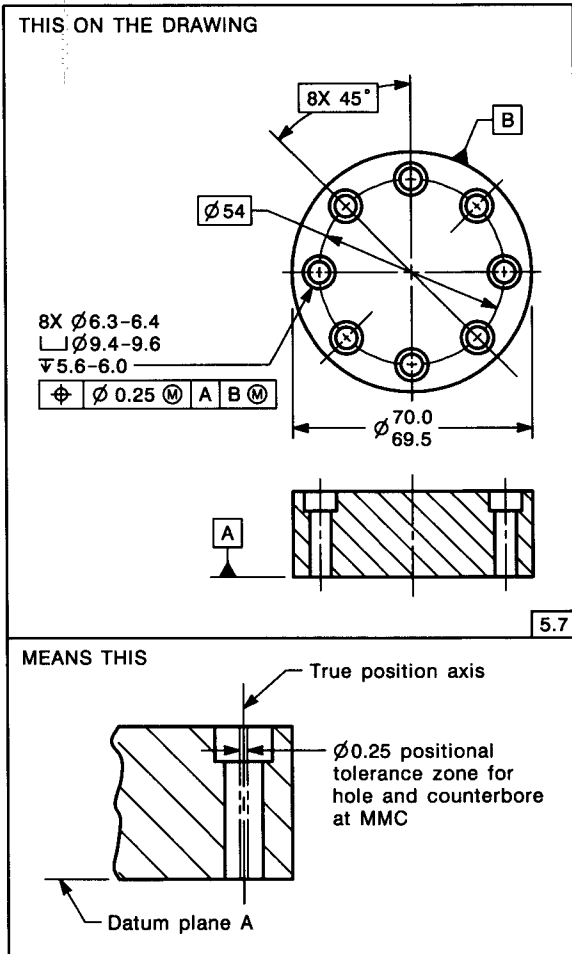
SAME POSITIONAL TOLERANCE FOR HOLES AND COUNTERBORES, SAME DATUM REFERENCES
